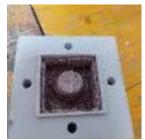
Lego block mould attempt – Cornstarch + sawdust recipe
